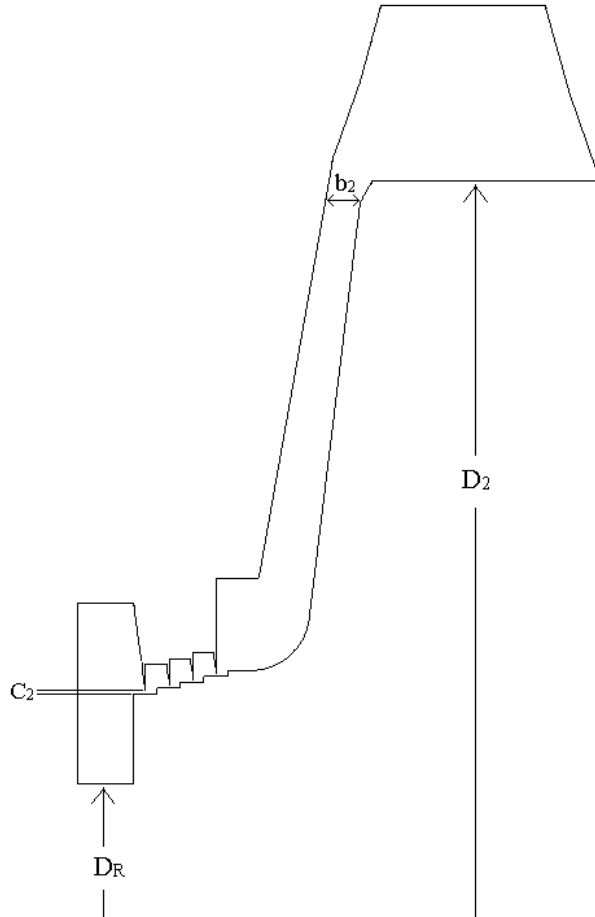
Cross section of the shroud cavity modeled from Soldatova's paper.
